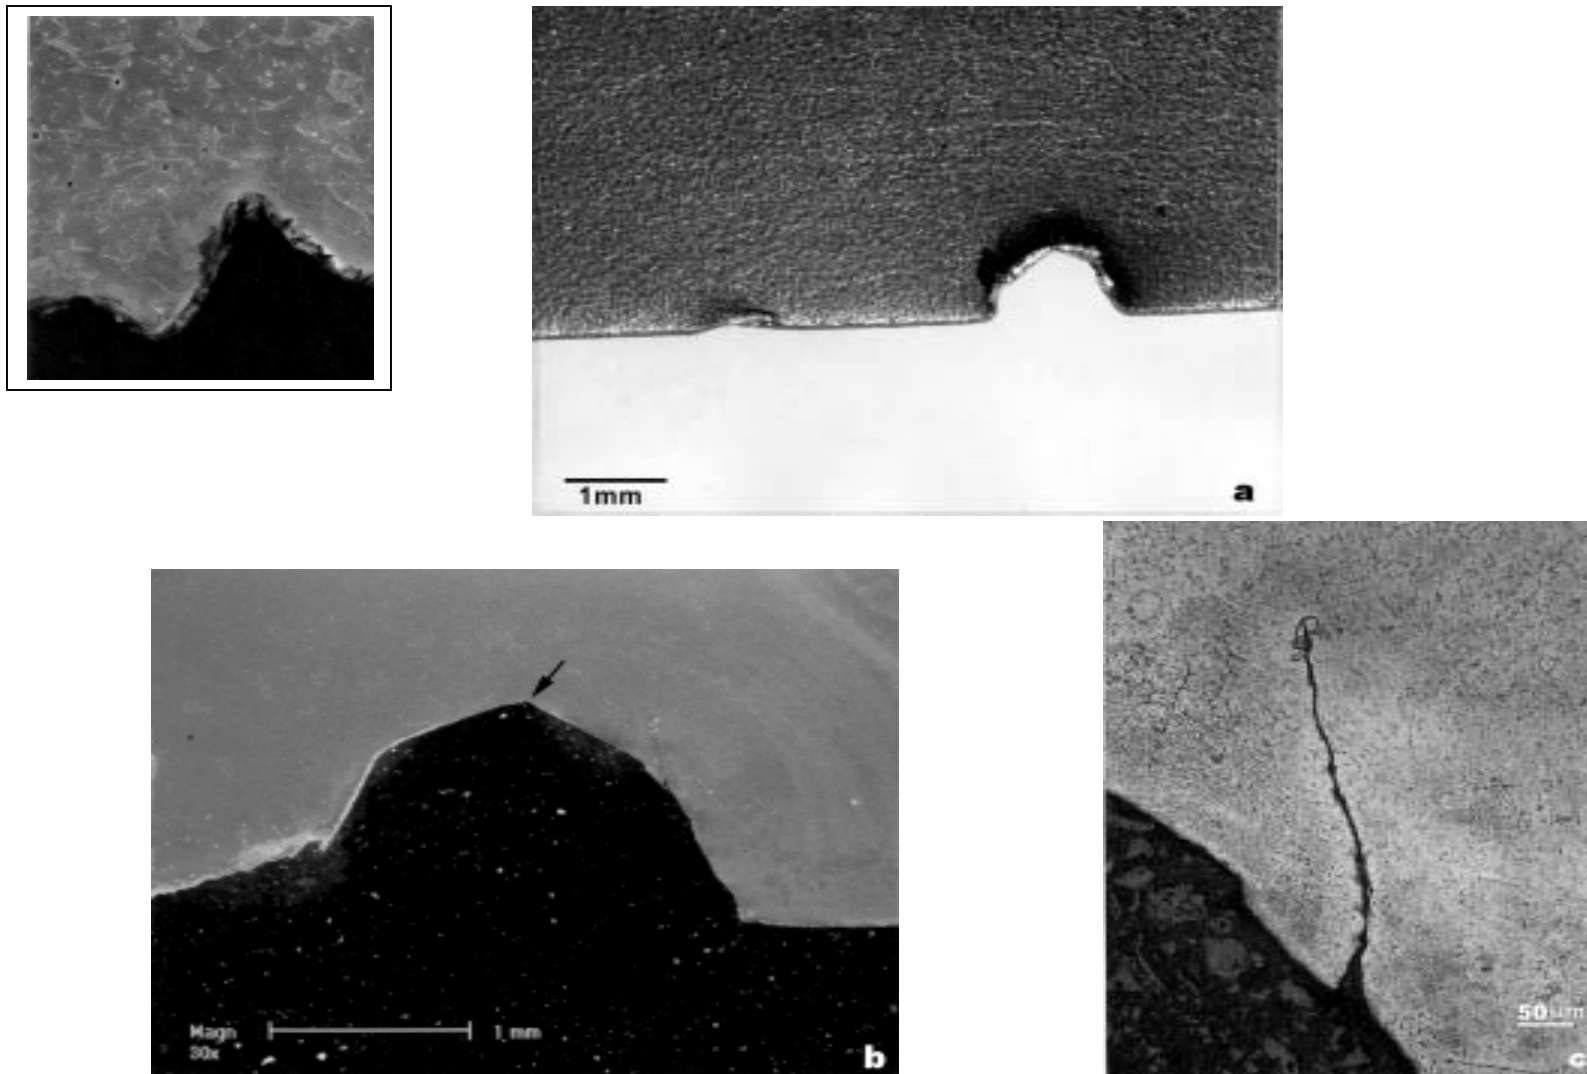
A.11. U-shaped FOD from F100 2nd stage fan blade showing: (a) overall view of 0.046-in.-deep notch with 0.025-in. root radius, (b) close-up view of notch and crack on right flank, (c) magnified view of crack exhibiting large deformation and crack opening, (d) deformed microstructure along interior section of notch indicated by arrow in (b).
